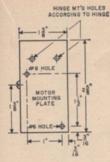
Mount motor to motor mounting plate. Then attach assembly to steering yoke by means of a hinge.
